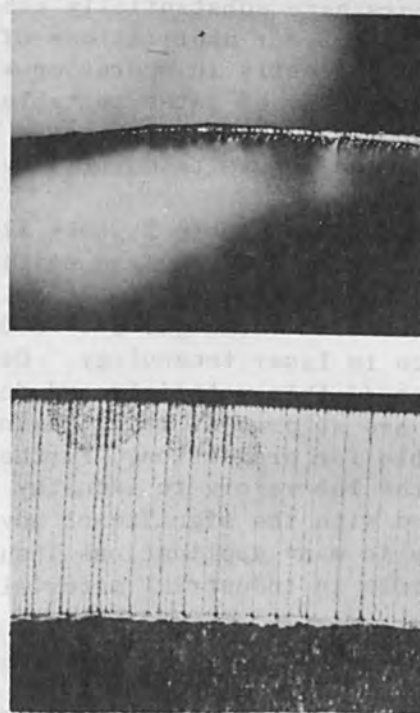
Laser cut characteristics in Borsical™ tape 0.009 in. thick; laser power 3.9 kW, cutting speed 100 ft/min, no assist gas: (a) edge view, (b) end view.
